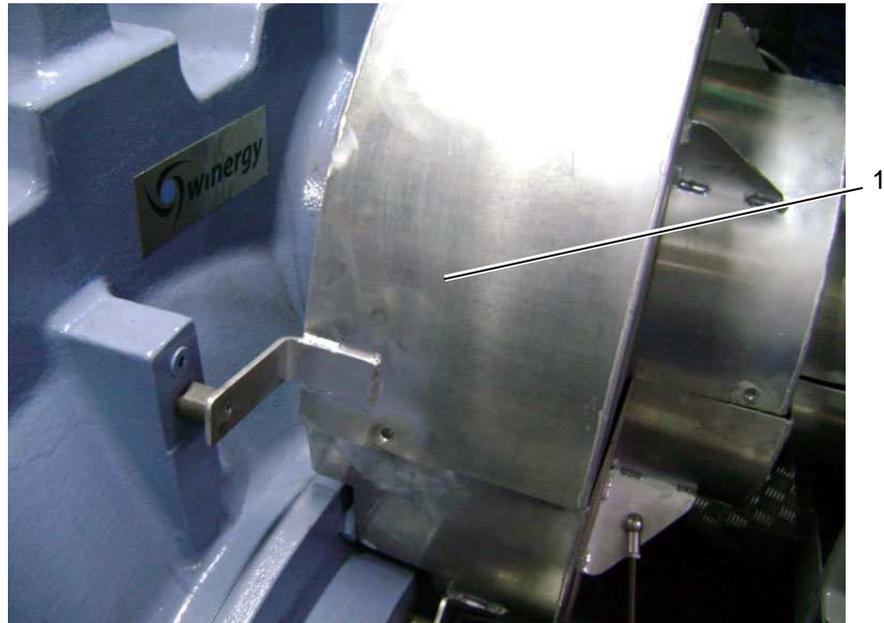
1 Enclosure of the rotor holding brake
